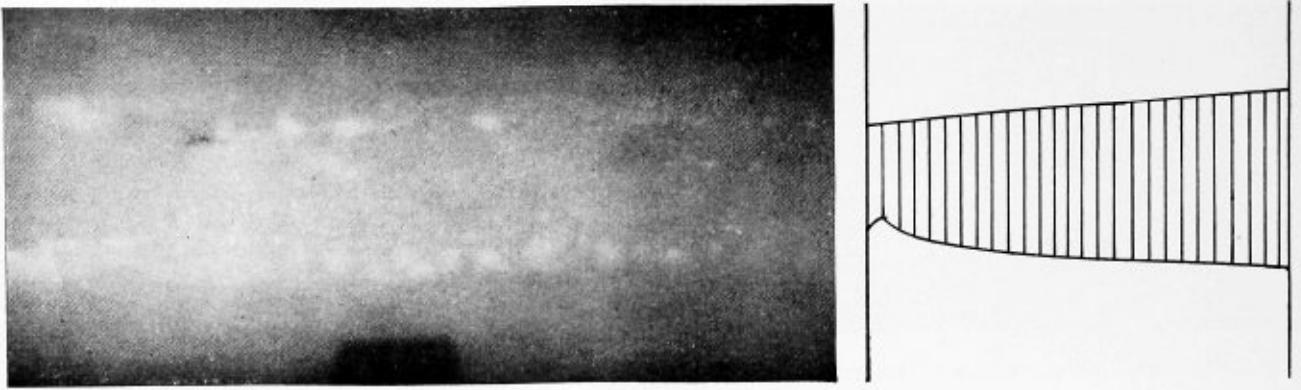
Exograph of weld containing slag inclusion in 2½-inch plate stock
